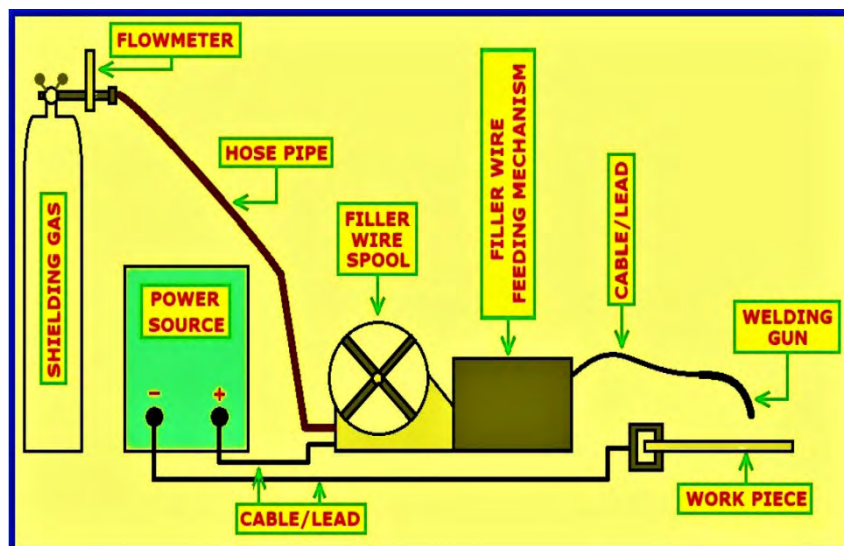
MIG Welding – Gas Metal Arc Welding (GMAW)
